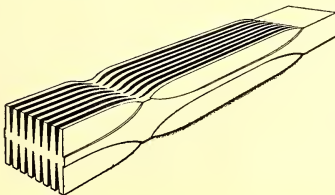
PERSPECTIVE VIEW OF PART OF FINISHED PLATE
